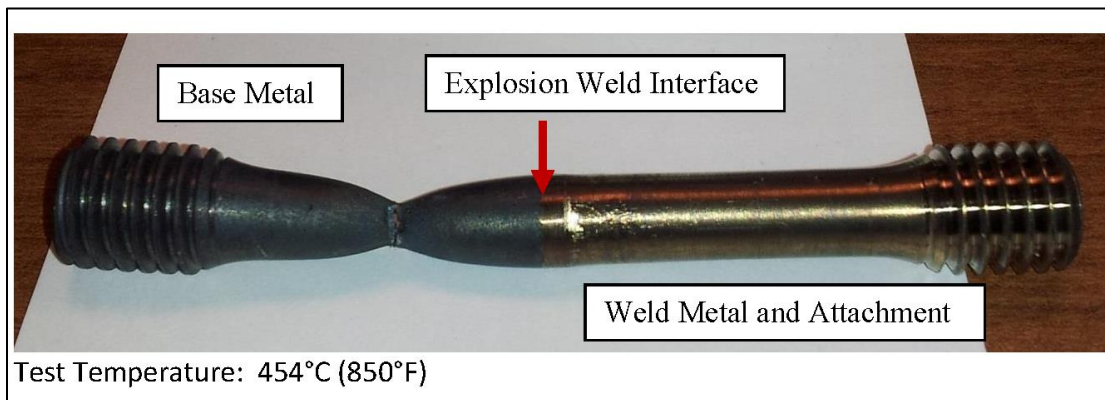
Explosion Welded Clad Tensile Test Specimen with Welded Attachment
